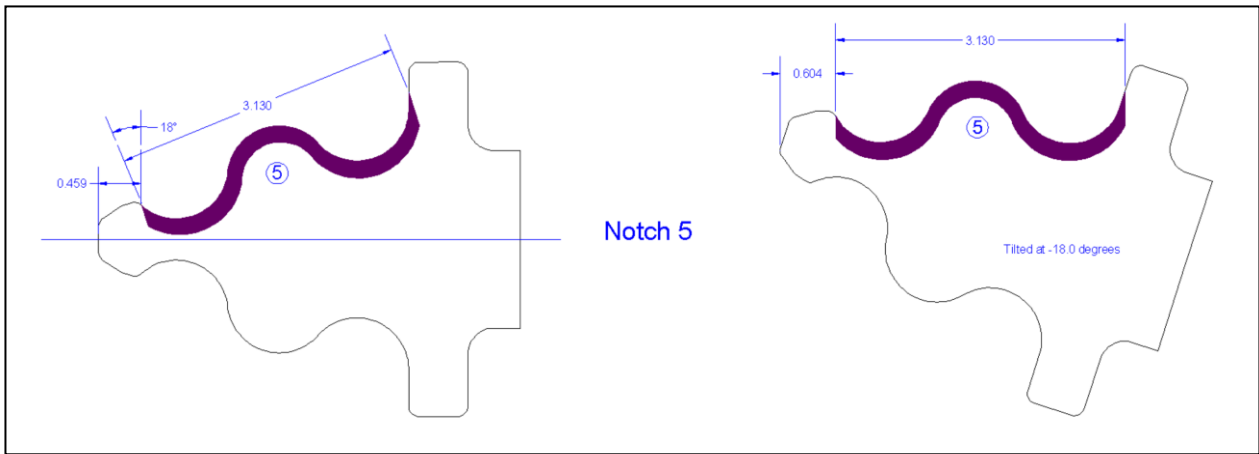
Method 1 and Method 2 drawings for notch 5
